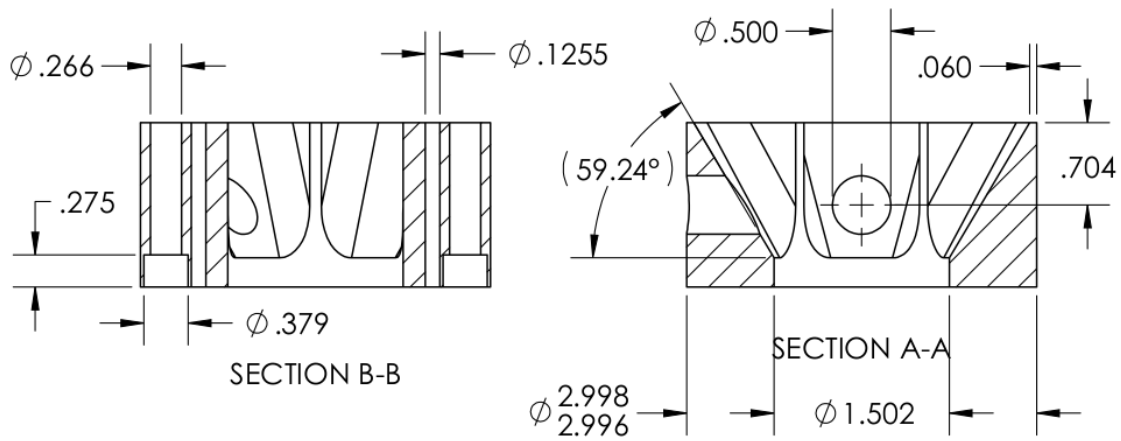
Engineering drawing of 30.8° baffle inserts with dimensions in inches.
